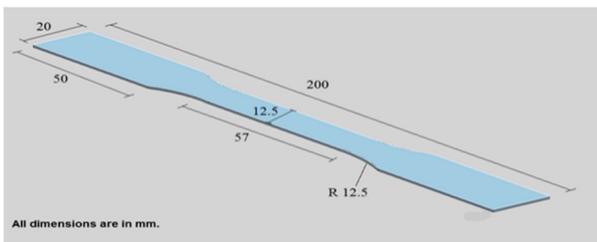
Dimensions of the tensile test specimen according to ASTM standard and E8M specification
